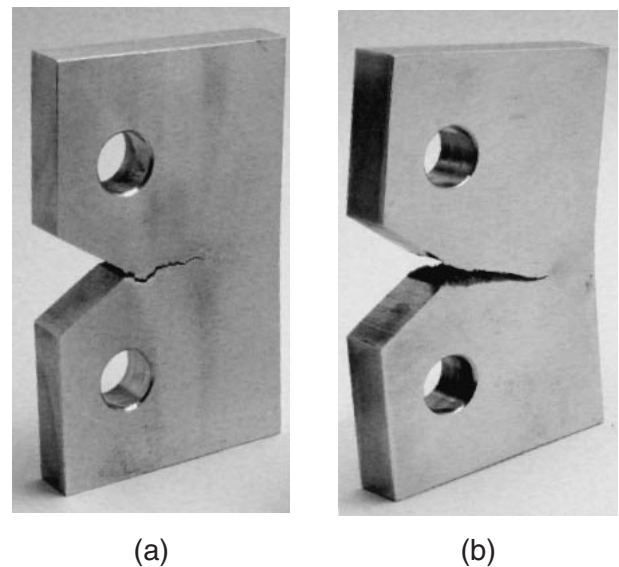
Macroscopic appearance of the cracked tear test specimens. (a) PM, (b) DC.
